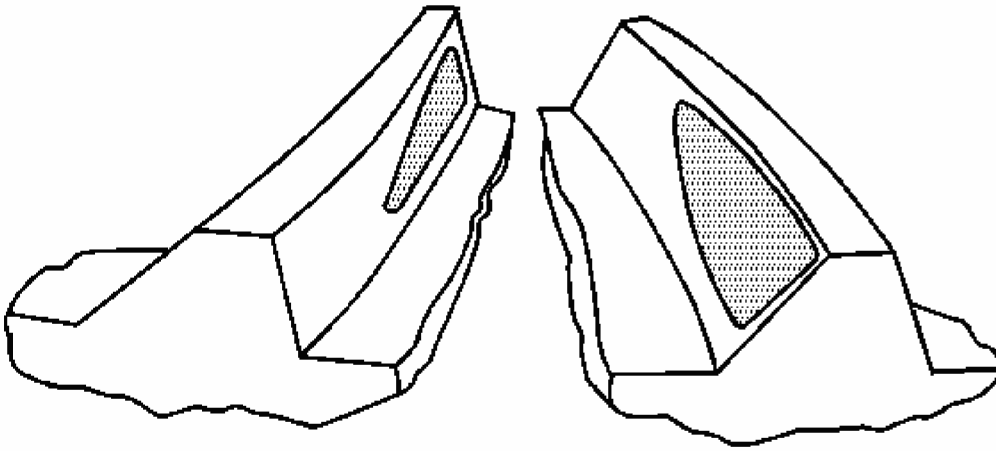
Identifying Drive Side Toe - Coast Side Heel Contact Pattern
